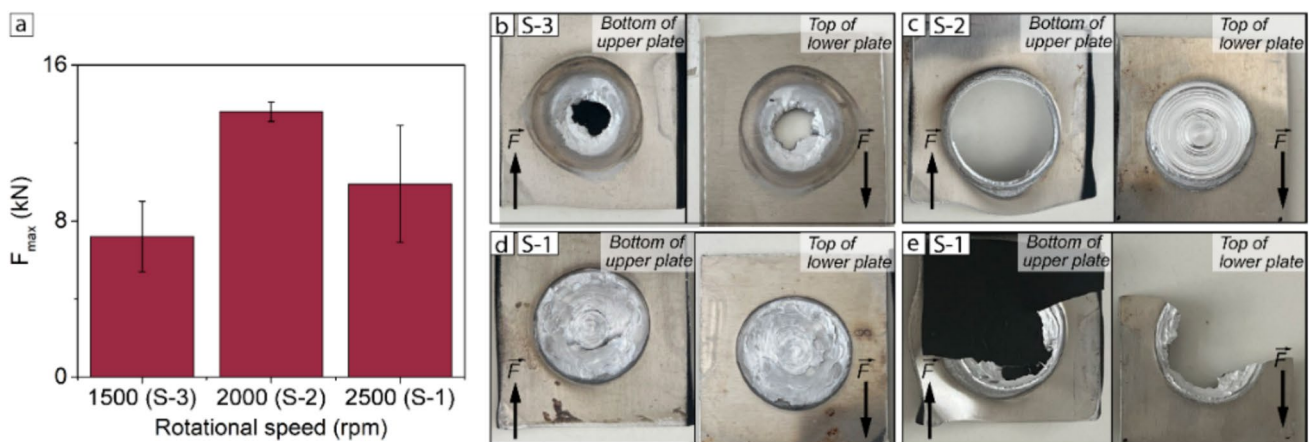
(a) Mechanical resistance of spot welds versus applied rotational speed in different samples. Fracture of samples (b) S-3, (c) S-2, and (d–e) S-1
